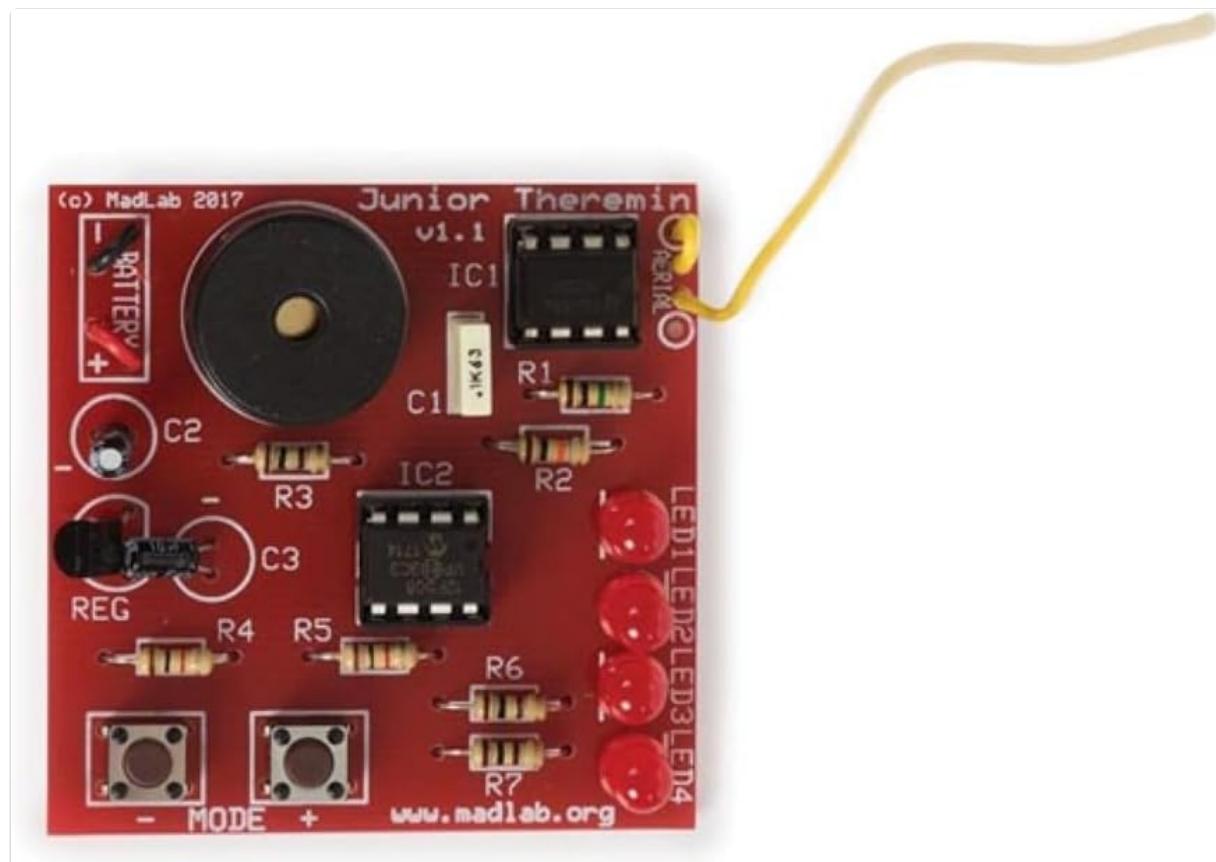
A fully assembled Whadda WSG105 Junior Theremin circuit board, showing all components soldered in place, including the speaker, ICs, LEDs, buttons, and antenna wire.
